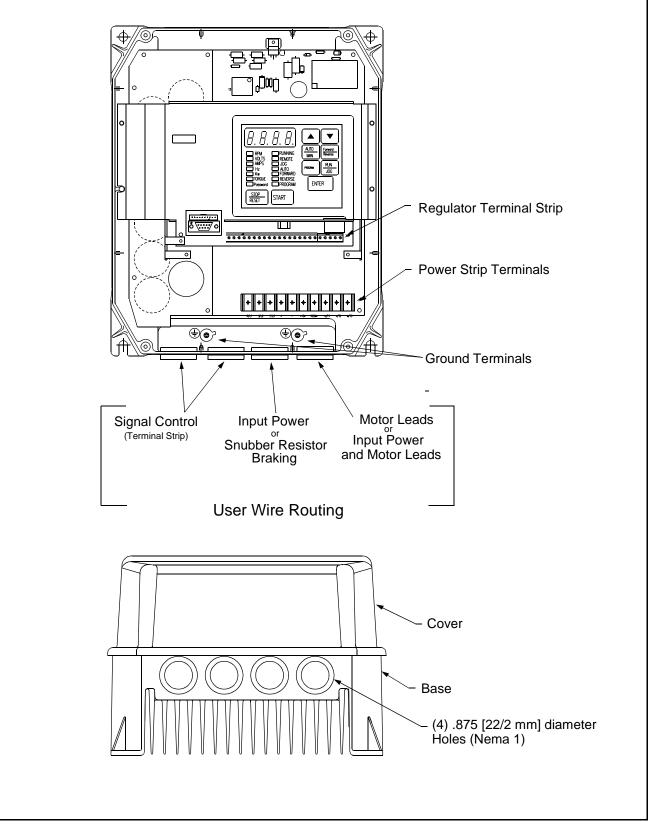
Wire Routing Locations for 1 HP Drive
